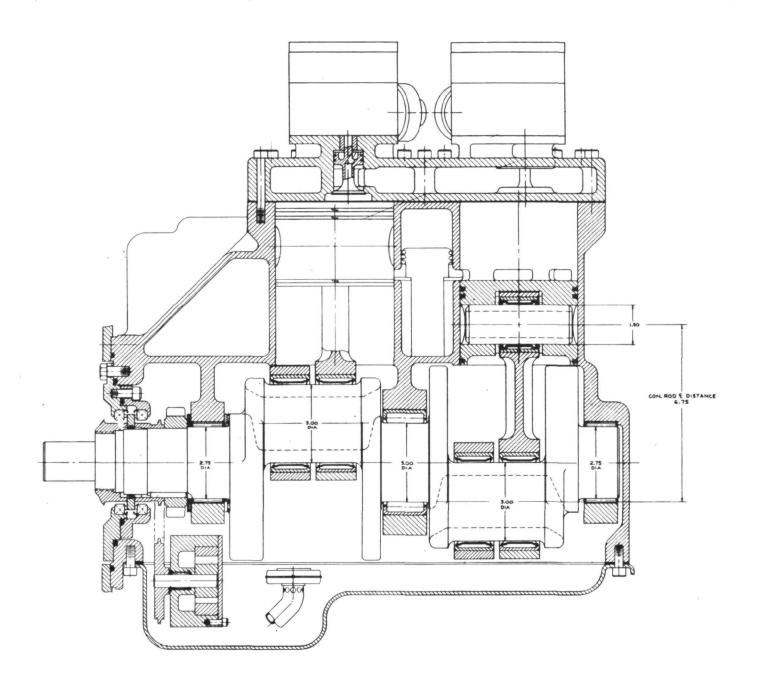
Expander Layout with American Bosch Hydraulic Valving - Side Cross Section Through Cylinder Bank and Crankcase.
